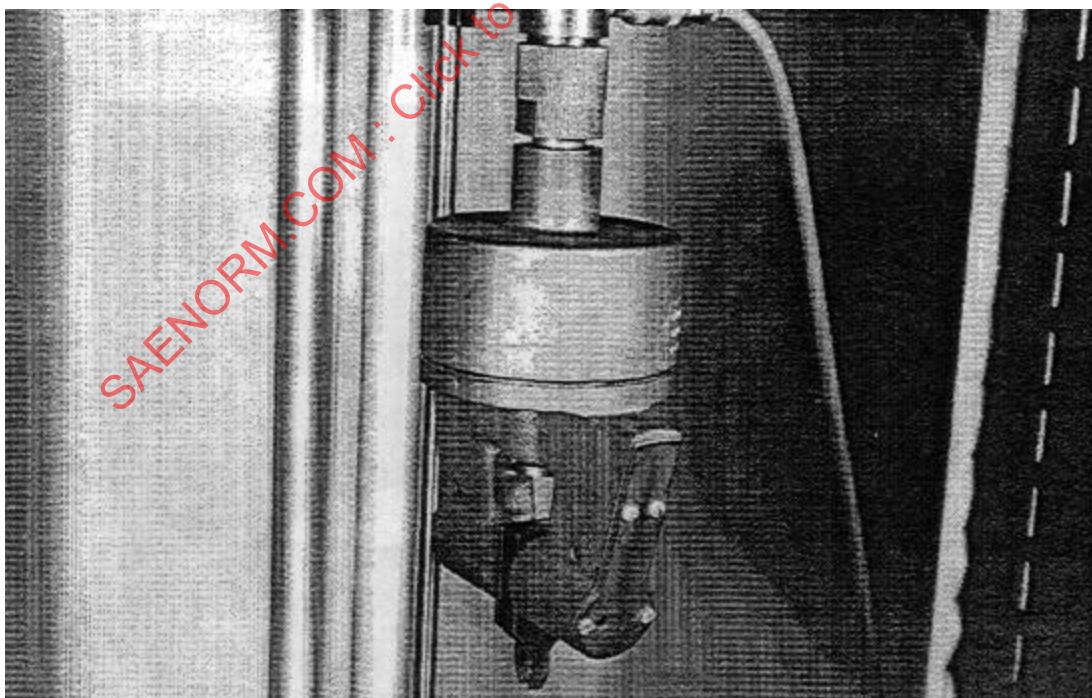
AIR CHUCK CLAMP (UPPER FIXTURE)
